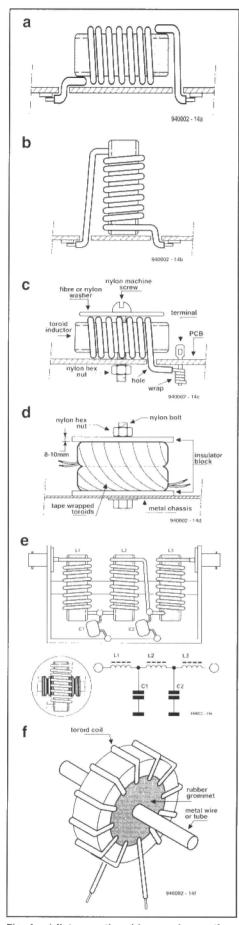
a) flat mounting; b) on-end mounting; c) secured mounting (use nylon machine screws); d) mounting high power or high voltage toroidal inductors or transformers; e) suspending toroid inductors on a dowel; f) mounting method for a 'single turn primary' transformer in RF watt-meters or VSWR meters.
